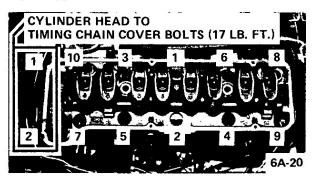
A-20 Cylinder Head Bolt Tightening sequence
